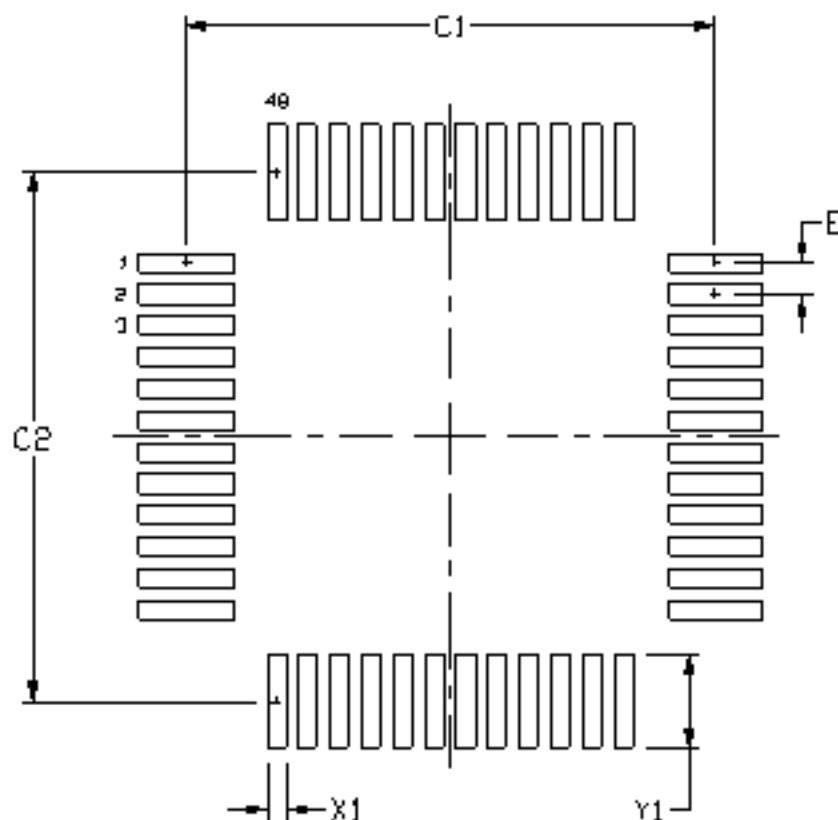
TQFP48 PCB Land Pattern Drawing
